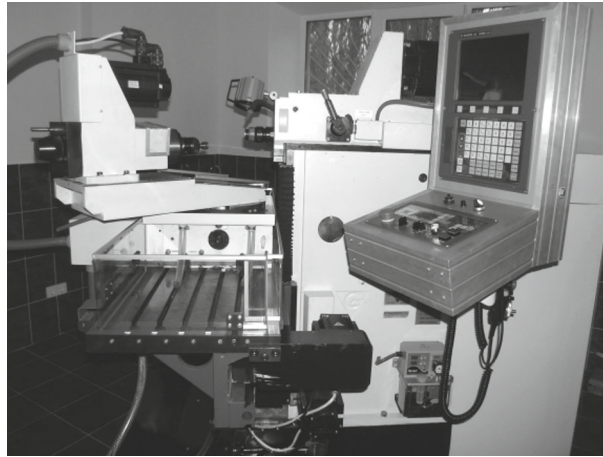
Experimental multipurpose four-axis bench based on an OMM64SCE02 horizontal milling machine.
